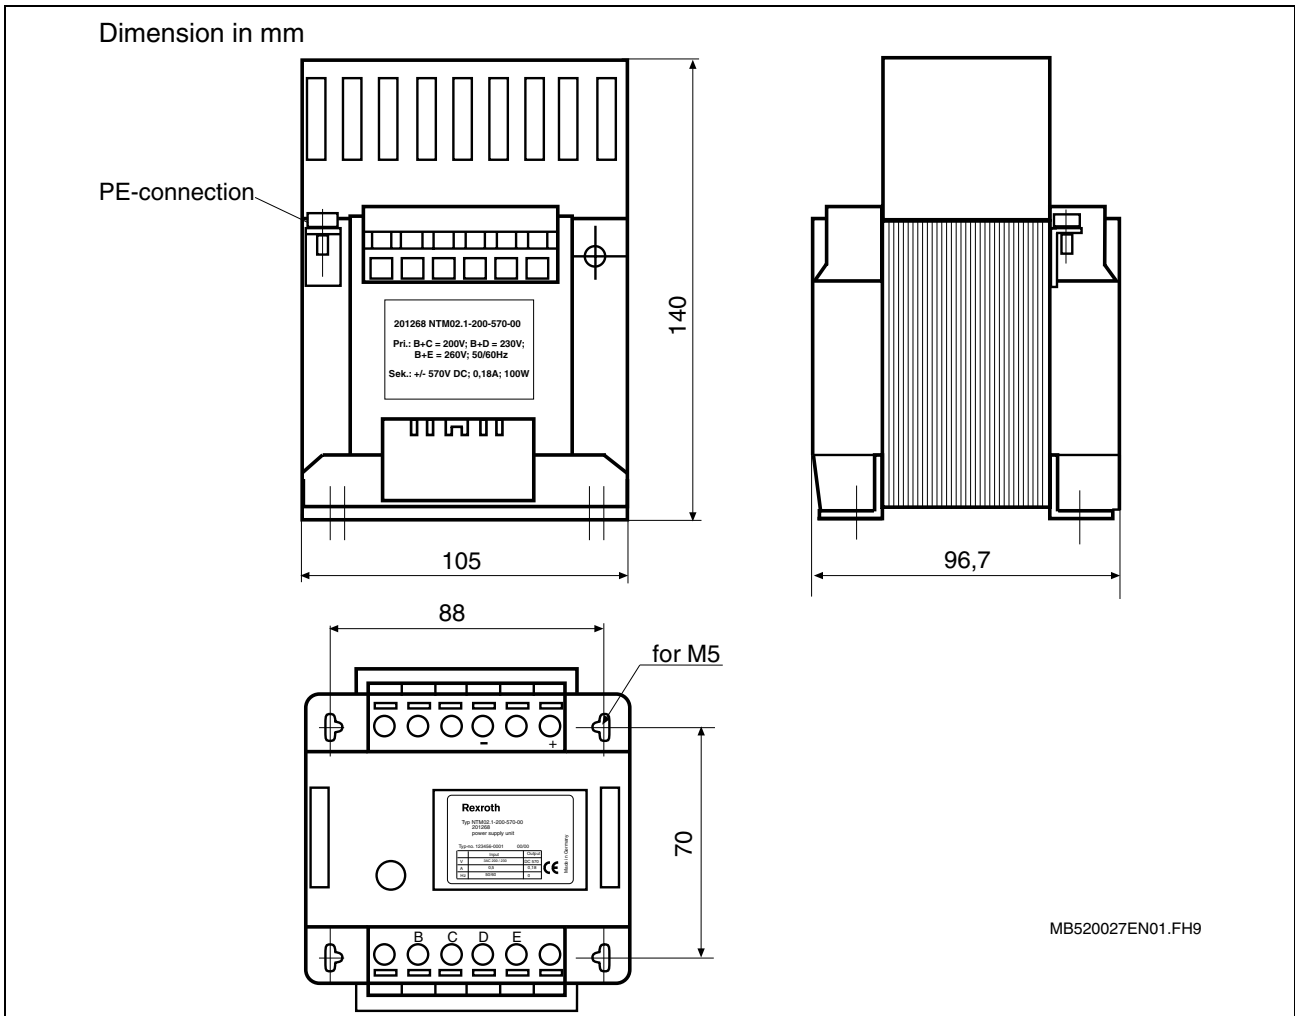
Dimension Drawing NTM02.1 power pack module
